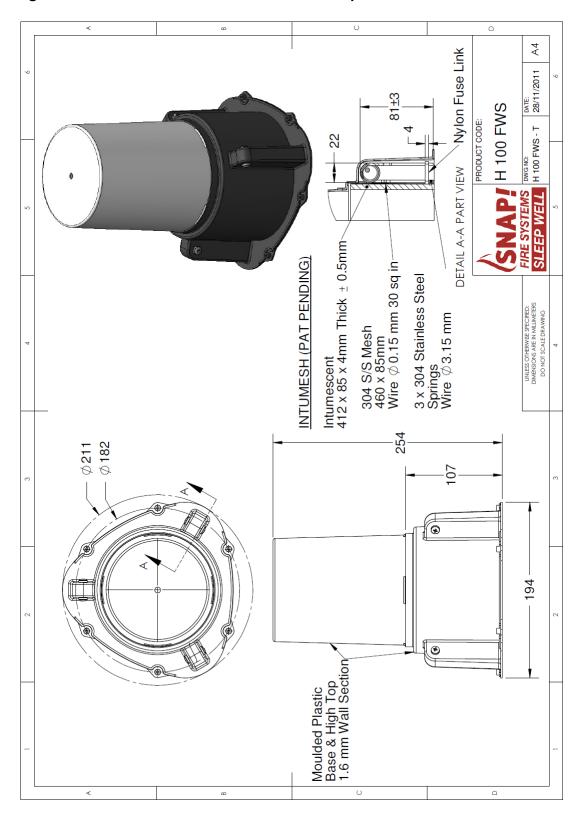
H 100 FWS Cast-in Collar installed to specimen No. 7
